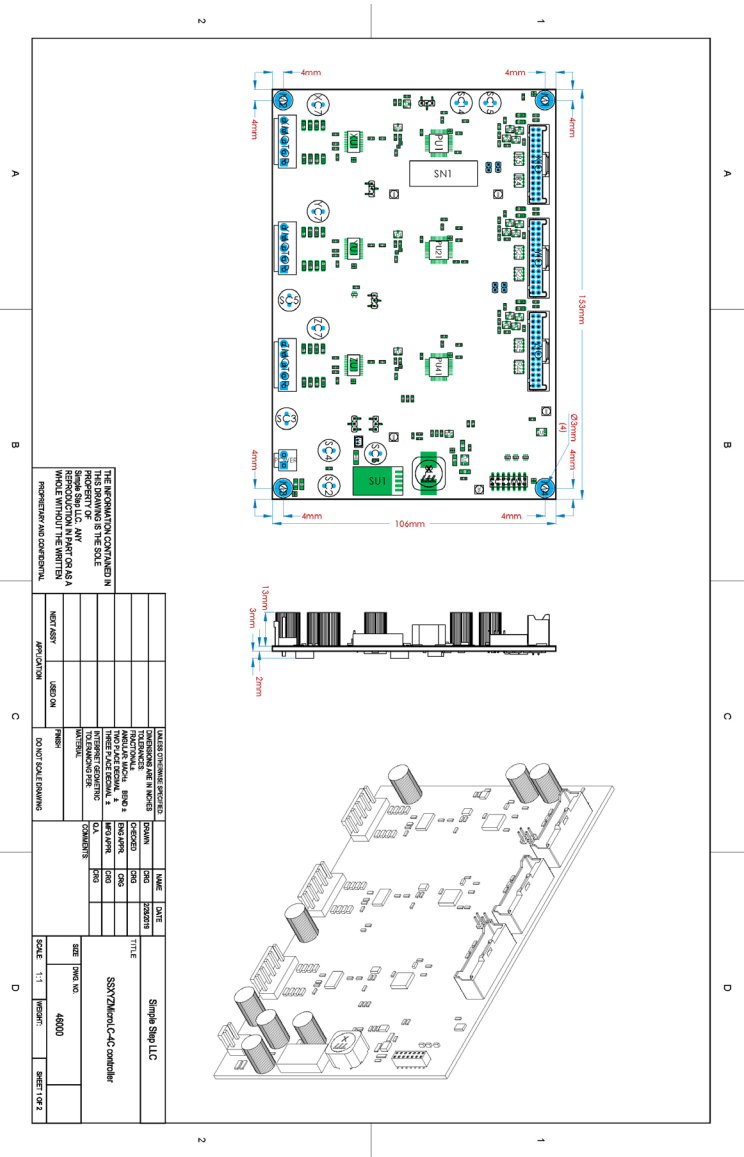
SSXYZMicroLC Board Mounting Hole Outline
